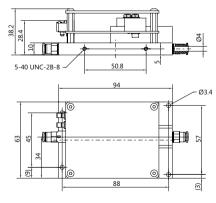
Outline drawing of DPD series driver with general purpose pad
